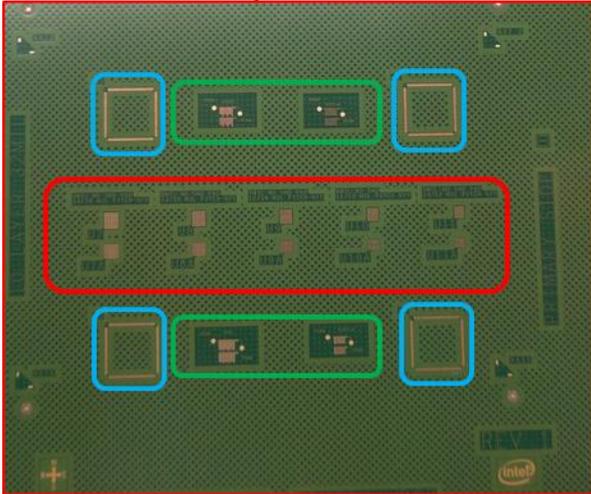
Design Image of Golden Reference Board (Red - BGA Pads, Blue - QFP pads & Green - Passives)
